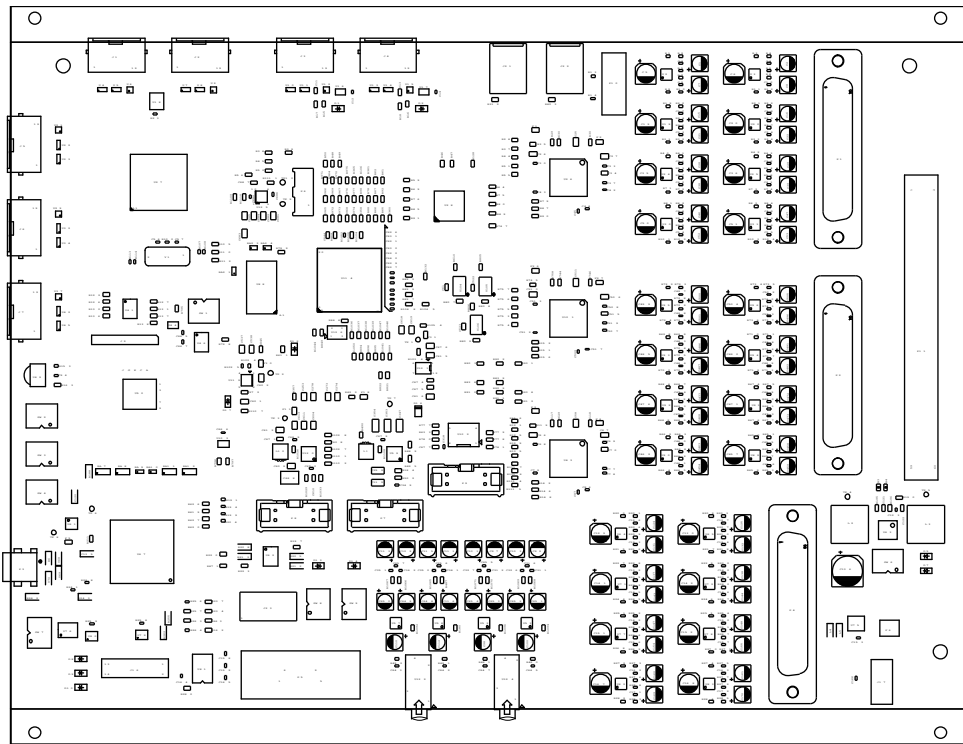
EVAL-MELODY-8 Printed Circuit Board (PCB) Assembly Drawing (Top Side)
